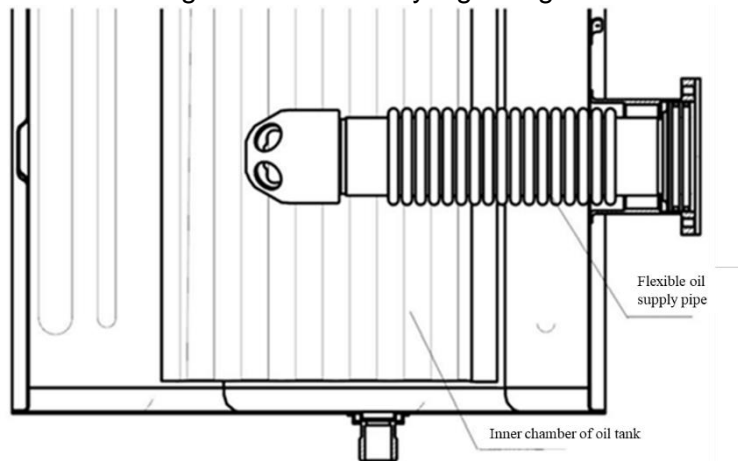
Aircraft engine lubricating oil tank with flexible oil supply pipe.
